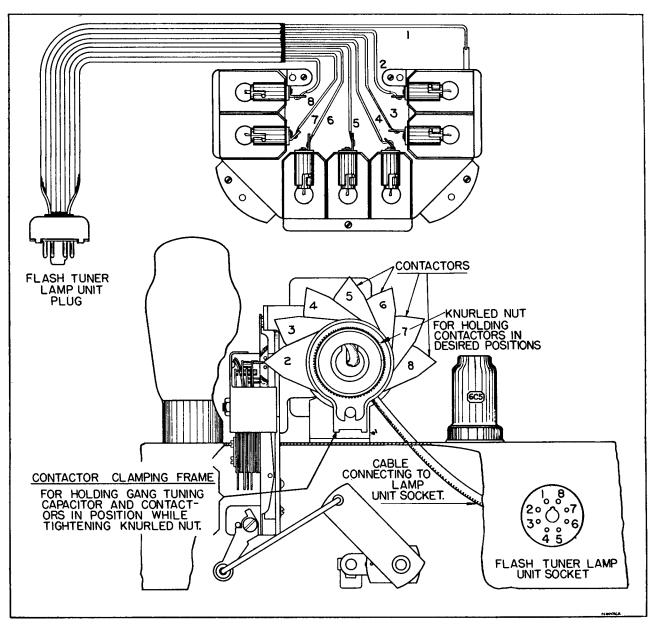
Showing Flash Tuner Lamp Unit With Escutcheon Plate Removed (Top Figure) and Rear View of Receiver Showing Flash Tuner
